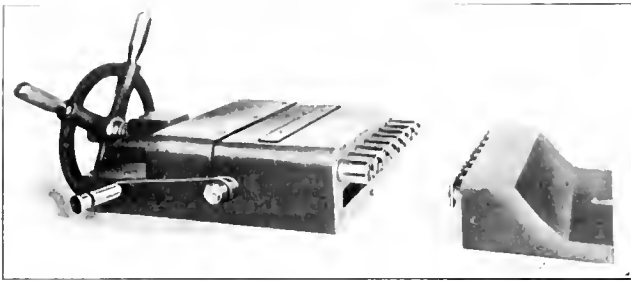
Fluting Fixture shown in Place on Machine in Fig. 10.
